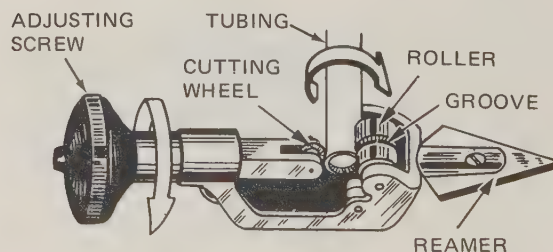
Cutting tubing with a tubing cutter. (Imperial Brass Manufacturing Company)
